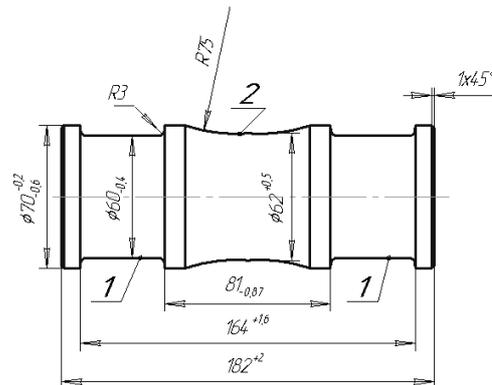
Roller: 1 – roller bearing surface; 2 – roller central part
